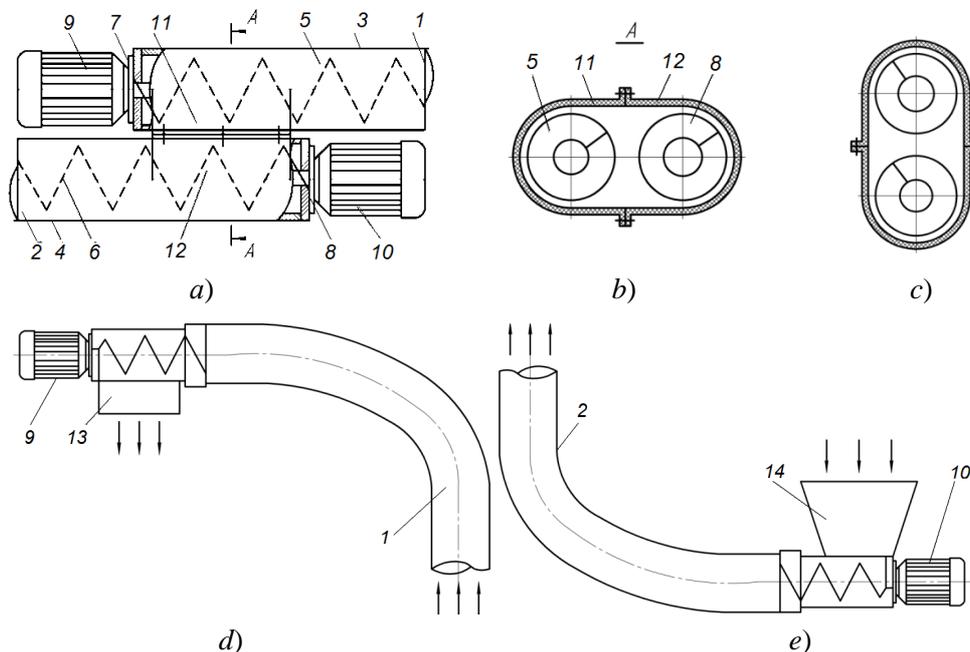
Design of a flexible screw conveyer: a - general view; b - horizontal arrangement of trunk lines; c - vertical arrangement of trunk lines; d - one line loading conveyer version; e - one line unloading conveyer version
